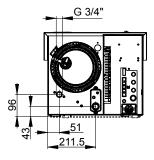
Unit dimensions unit "S" (dimensions in mm)
